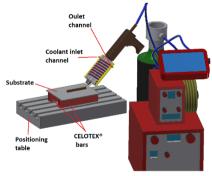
Torch refrigerant assembly and electrical insulation system.
